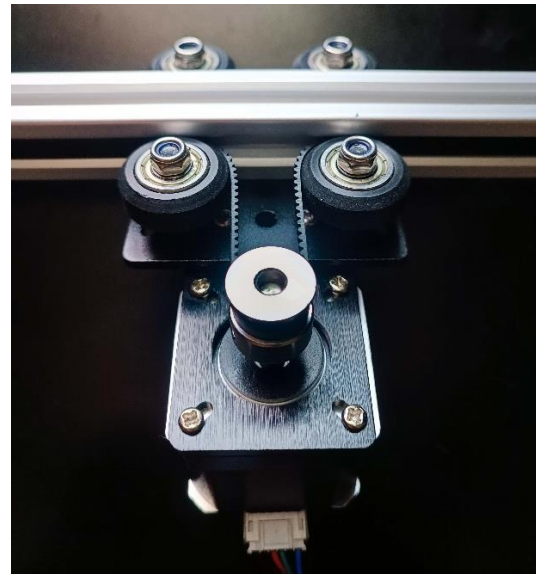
Toothed belt mounted on a rail with a stepper motor.
